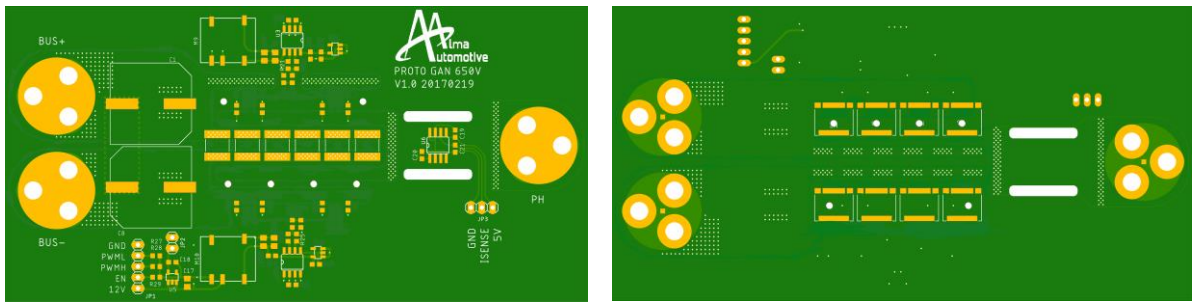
Top and Bottom layout of the 500V GaN inverter prototype
